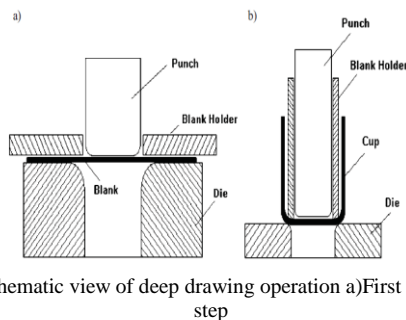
Schematic view of deep drawing operation a)First step b) Next step
